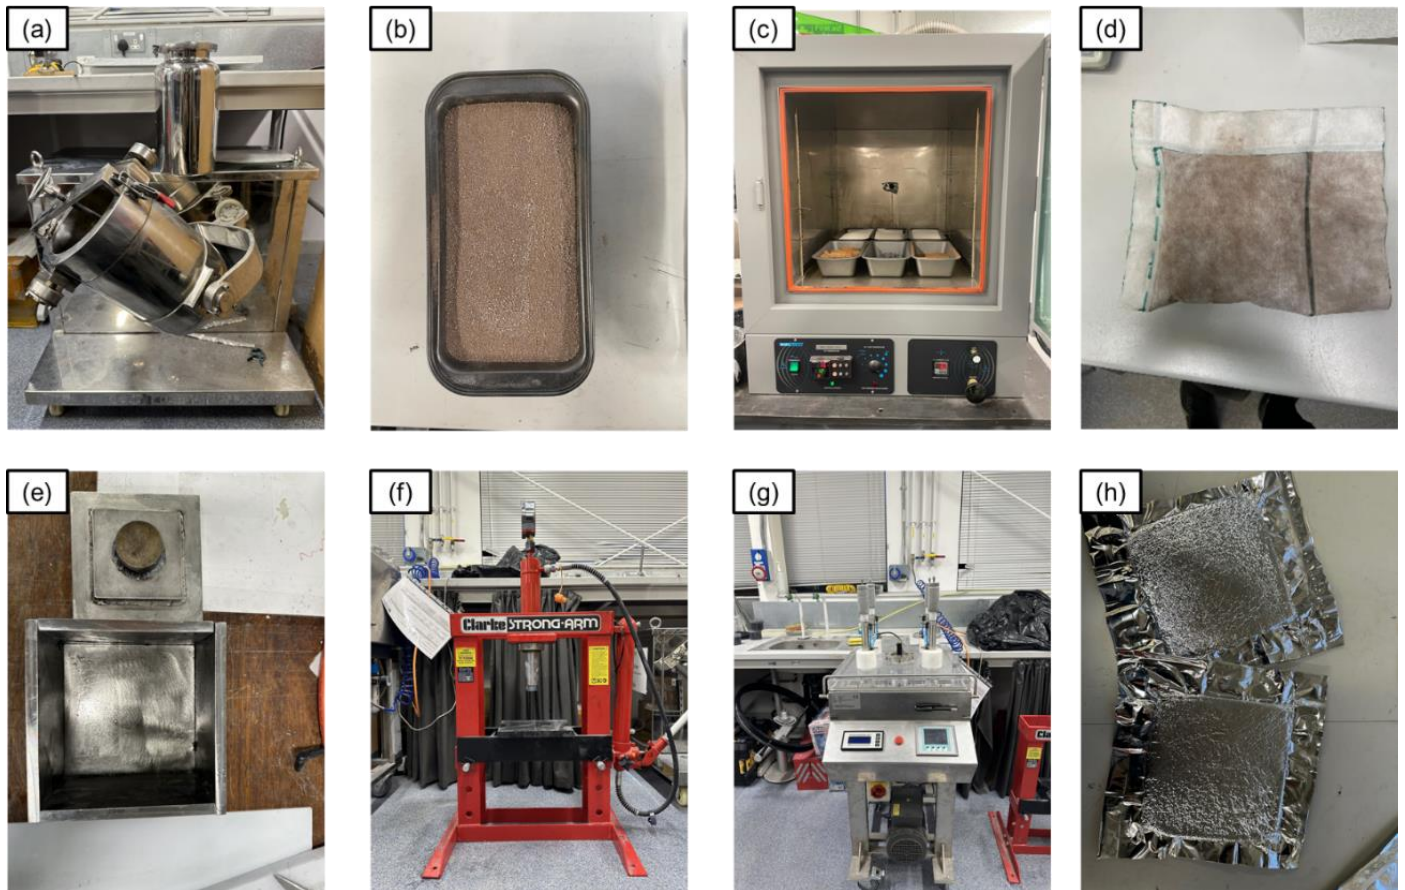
The procedure of manufacturing a VIP; (a) 3D mixer, (b) mixed loose core (EP-TNFs2), (c) oven used to dry the core, (d) core inside the fleece, (e) steel die, (f) hydraulic press, (g) vacuum sealer and (h) VIP product
